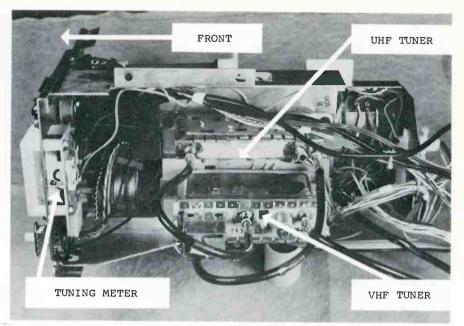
Both tuners are mounted on the bottom side of the tuning assembly. There are no shafts or other moving parts on the tuners.
